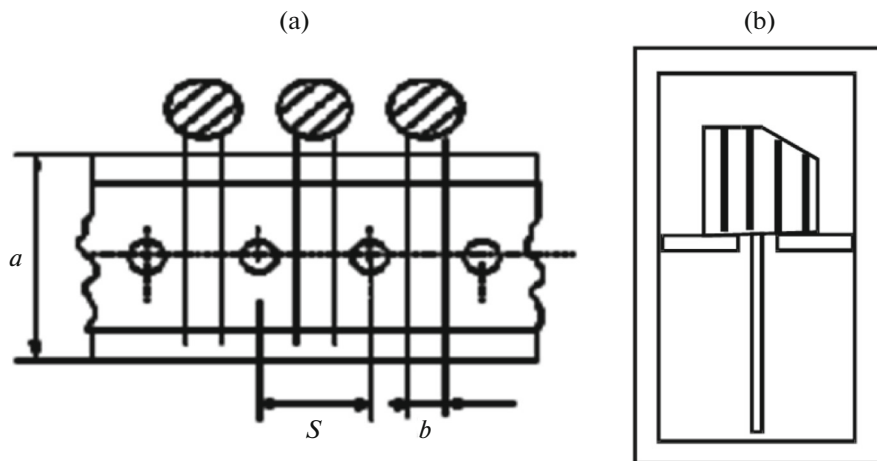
Packaging of components in (a) a single-row tape and (b) a cassette.
